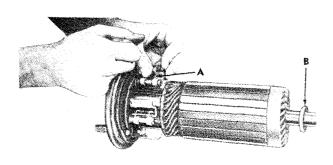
INSTALLING LEVER HOUSING AND DRIVE CLUTCH ASSEMBLY.
